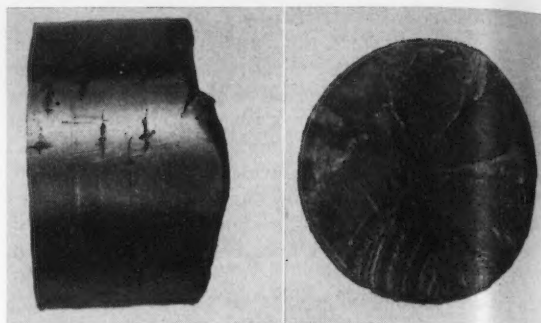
Corrosion fatigue failure of a propeller shaft.⁹ Approx. X 0.8.
